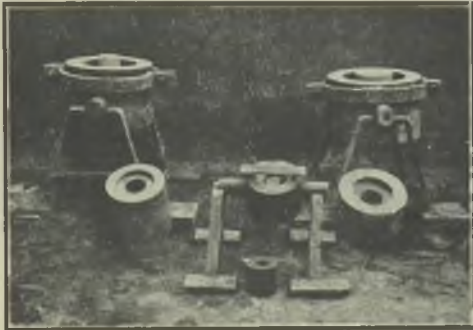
GROUP OF MOULDS, AND CASTINGS
